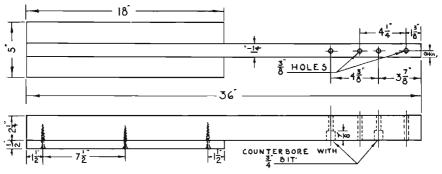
Detail of a Special Guide Fence For the Boring Machine
